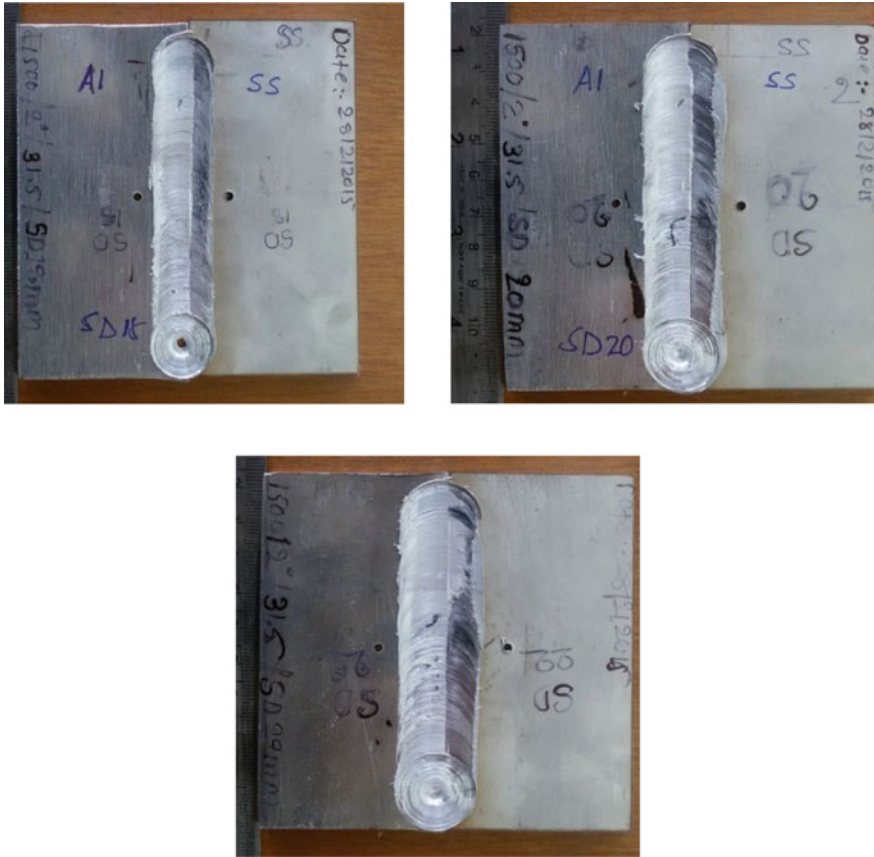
Al-SS friction stir welded coupons employing tool with three different shoulder diameters
